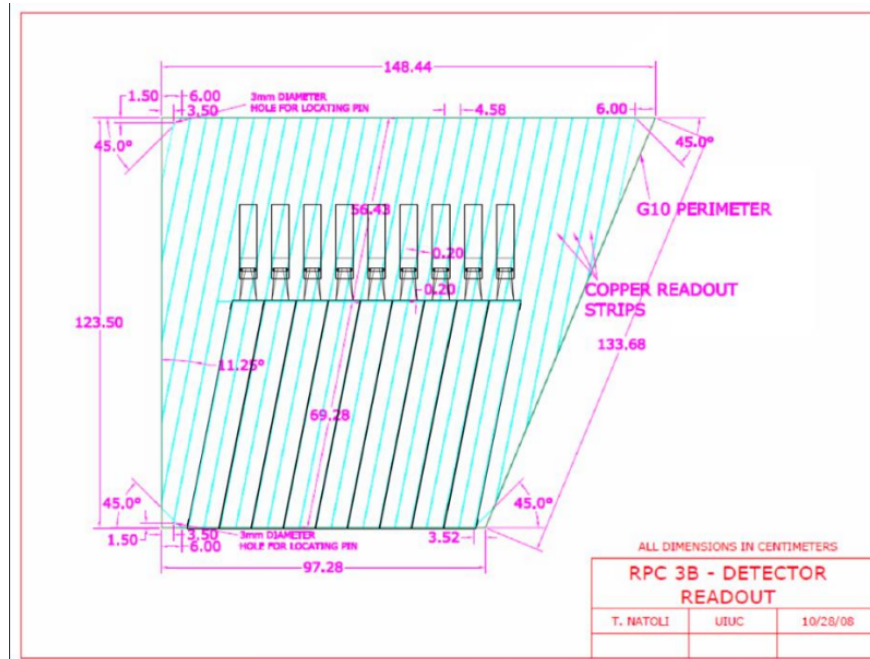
Blueprint of RPC 3 (Module B) readout strips overlaid with the hodoscope paddle design.
